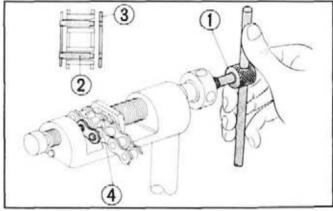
① Pressure bolt B ③ Joint plate ② Joint pin ④ Chain holder
